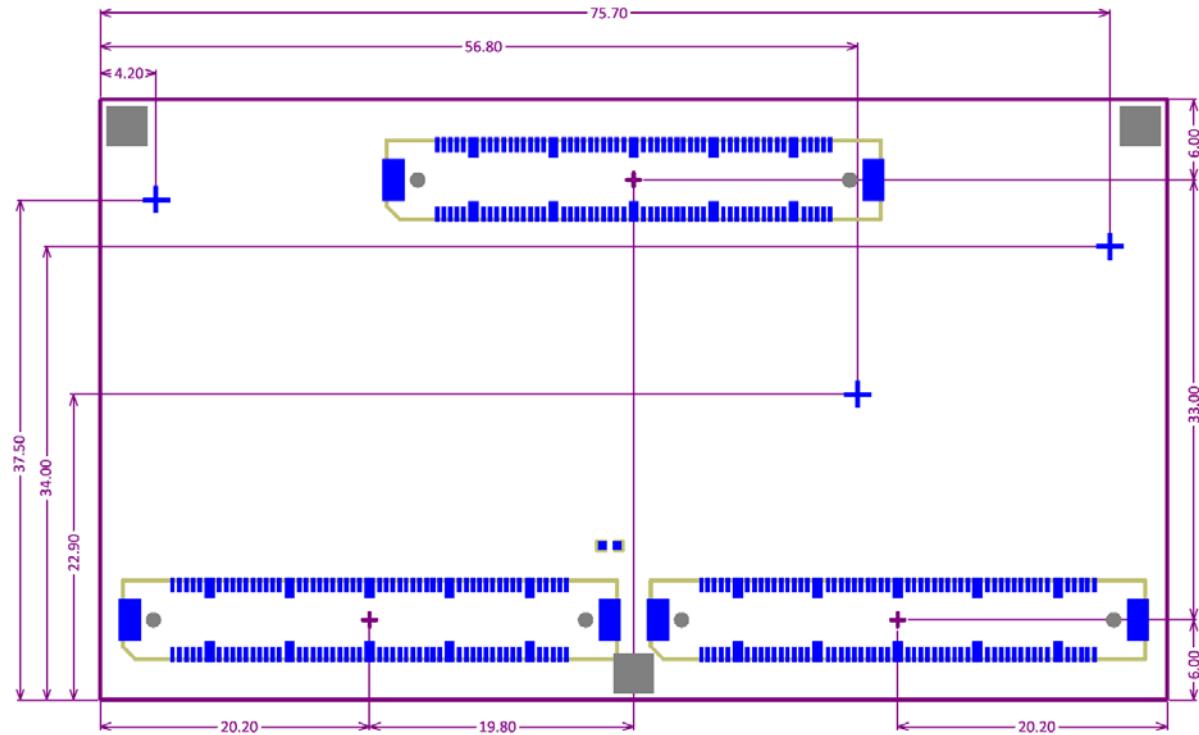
Mechanical outline and Bottom Connectors (bottom view)
